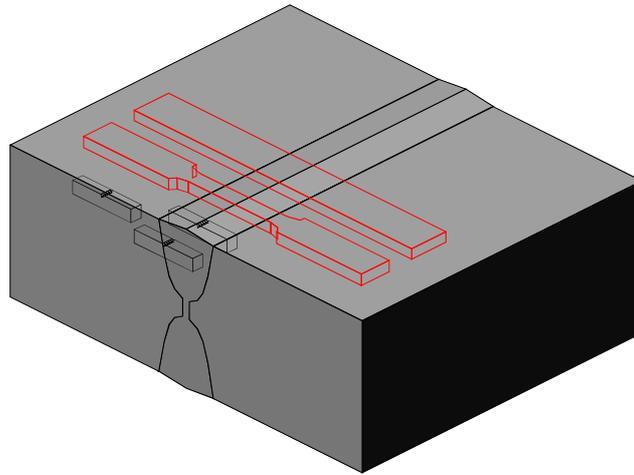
View of testing coupon with double "U" weld and specimens sampling
